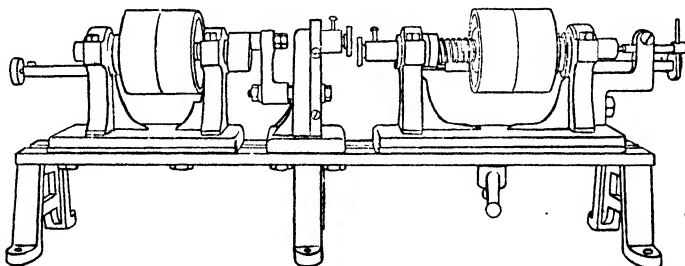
Small shaping machine with rotating and reciprocating movement for diamond dies (see also Fig. 35)
